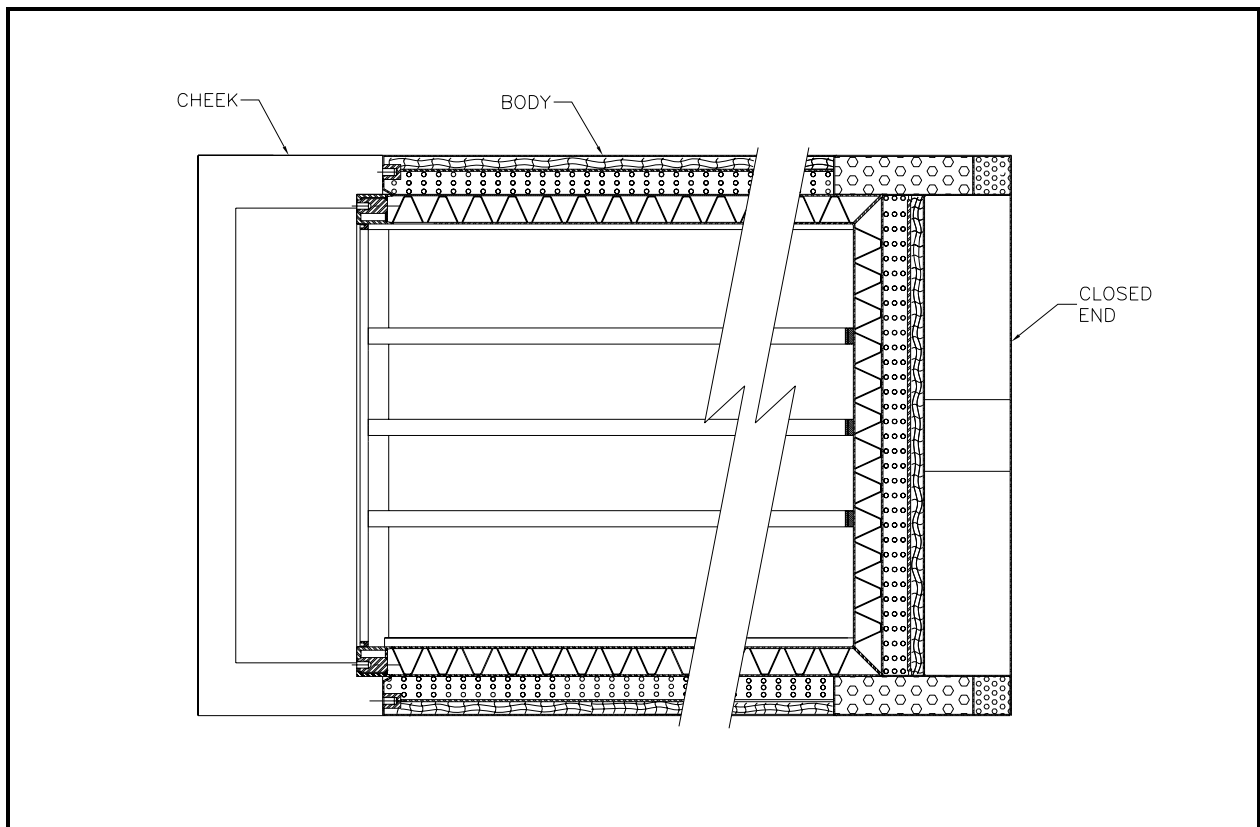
TRUPACT-III Packaging Body Cross-Section
